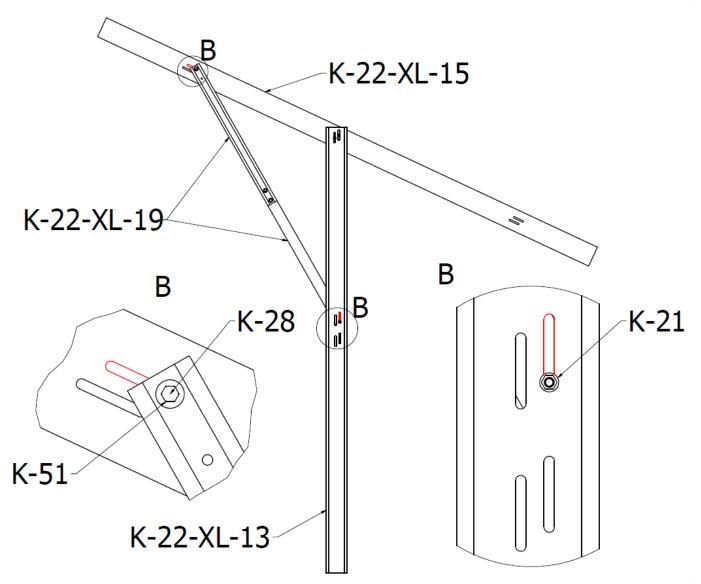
Assembly of the longer arm to the main beam and support (projection I)
